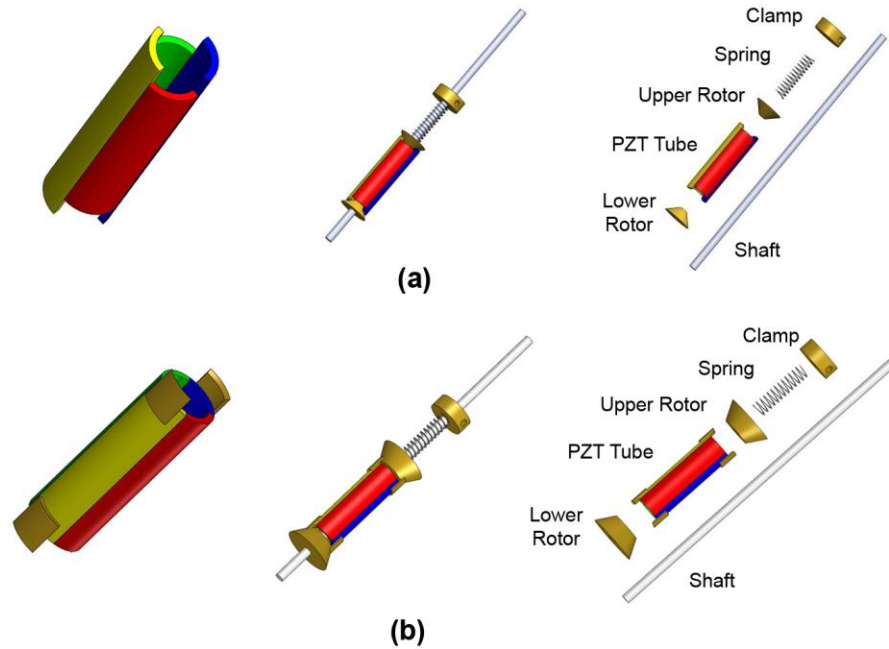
Ultrasonic motor designs with teeth [41]. (a) PZT teeth motor. (b) Metal teeth motor.
